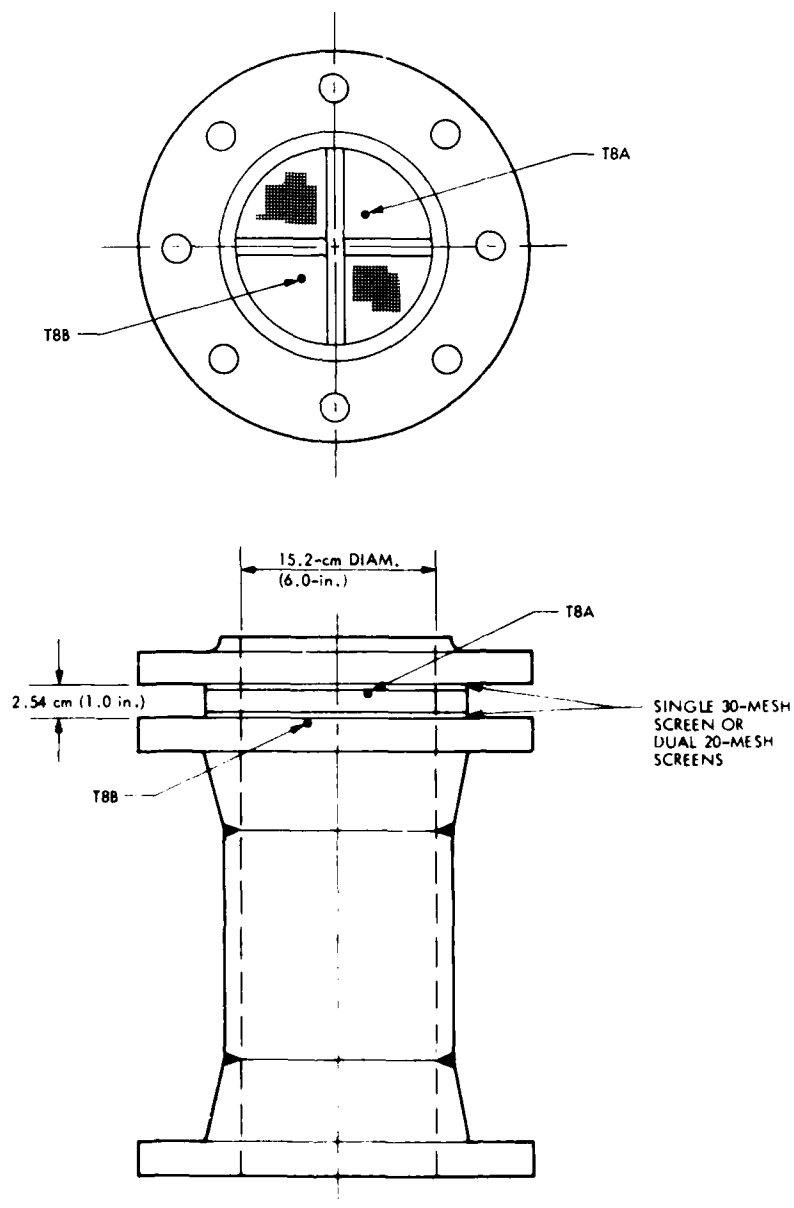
Screen-Type Arrister Test Assembly, 15.2-cm Diameter, Schematic Drawing
